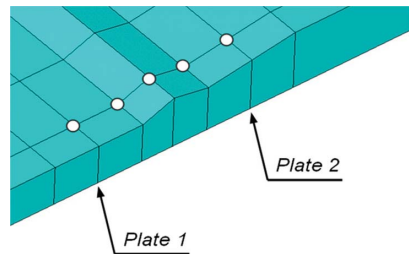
Idealised geometry of the butt-weld profile.
